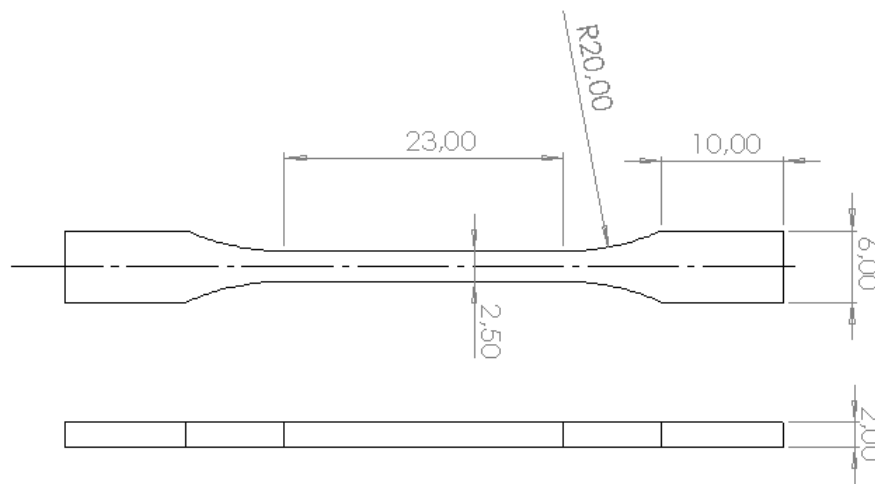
Uniaxial tensile test specimen's dimensions
